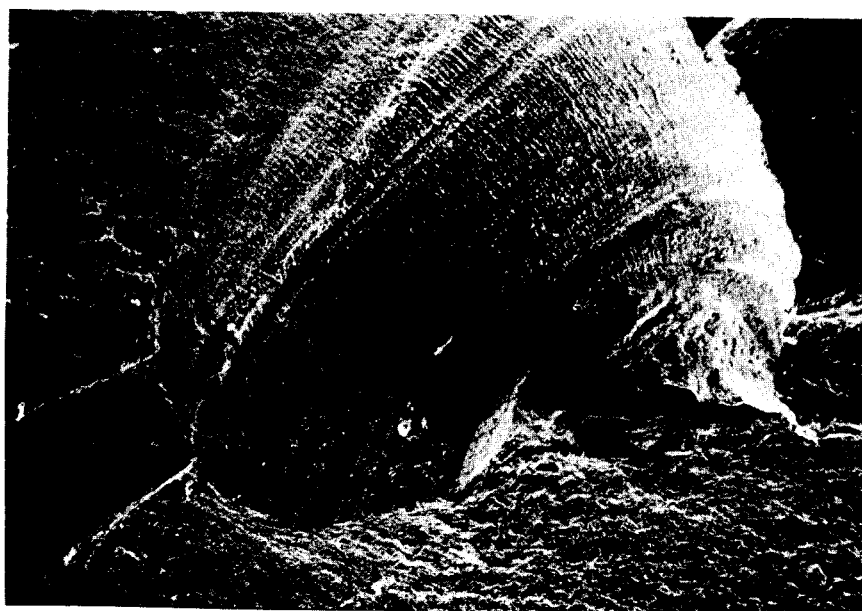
(b) FATIGUE CRACK (X52)
